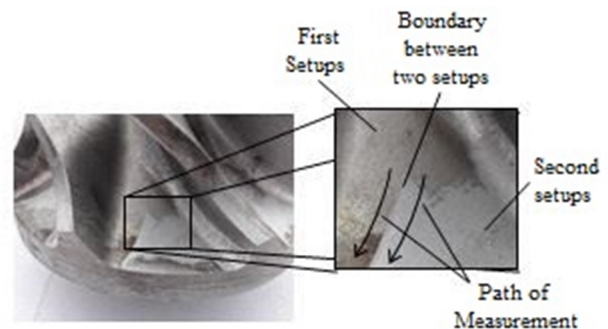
Boundary between two workpiece setups (1,2) and path of measurement CMM
